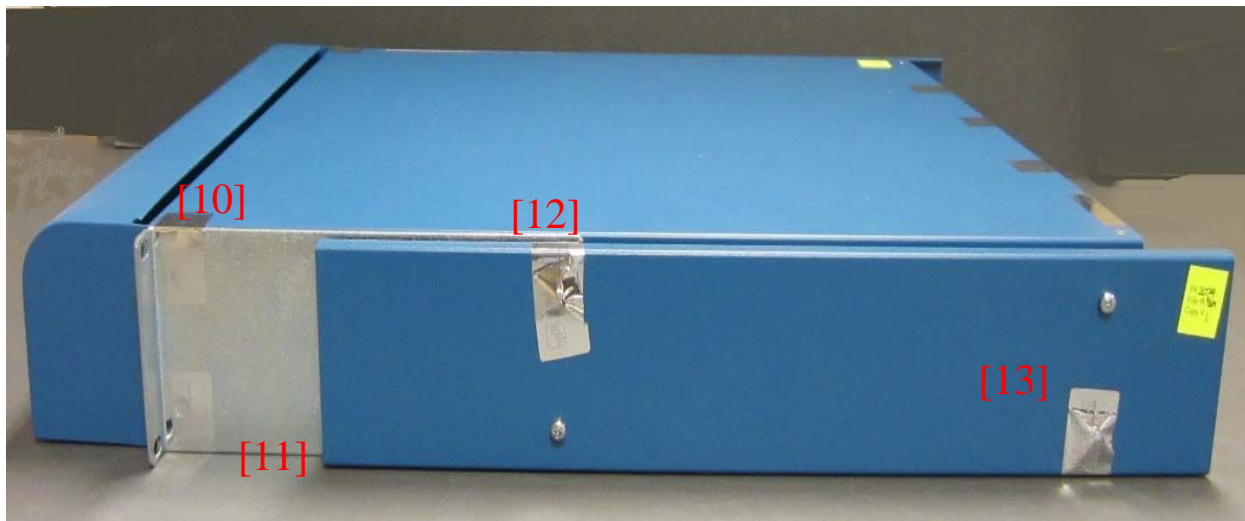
PA-5000 Series Right Side Tamper Seal Placement (4)
